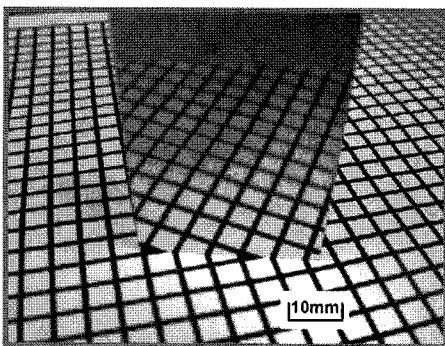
Finished surfaces of hardened steel machined by elliptical vibration planning with single crystal diamond tool
